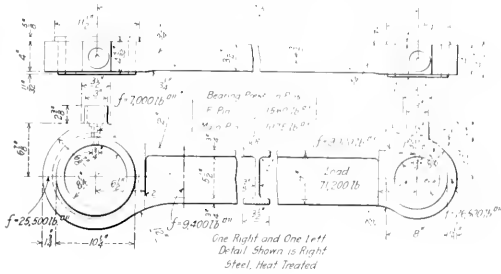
Side Rod of Pennsylvania Atlantic Type Locomotive
